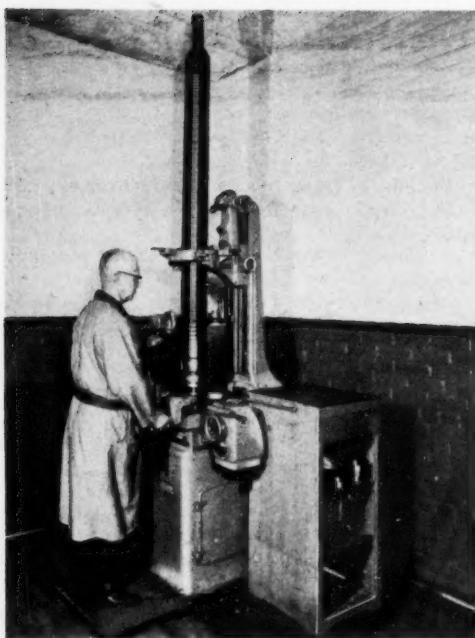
The Accuracy of the Gear Tooth Form on the Broach is Inspected on a Special Involute-profile Checking Machine with Reference to a Master Base Circle
